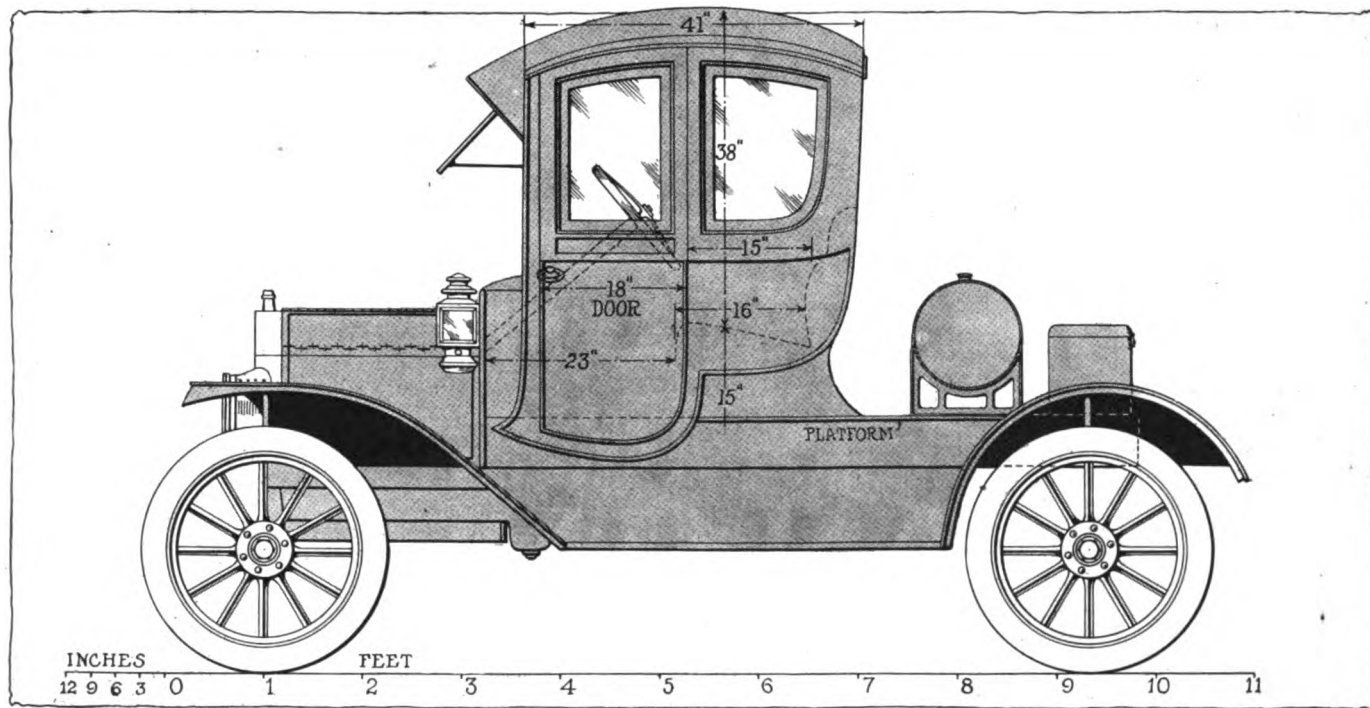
Side elevation of coupe body mounted on platform of Ford runabout
